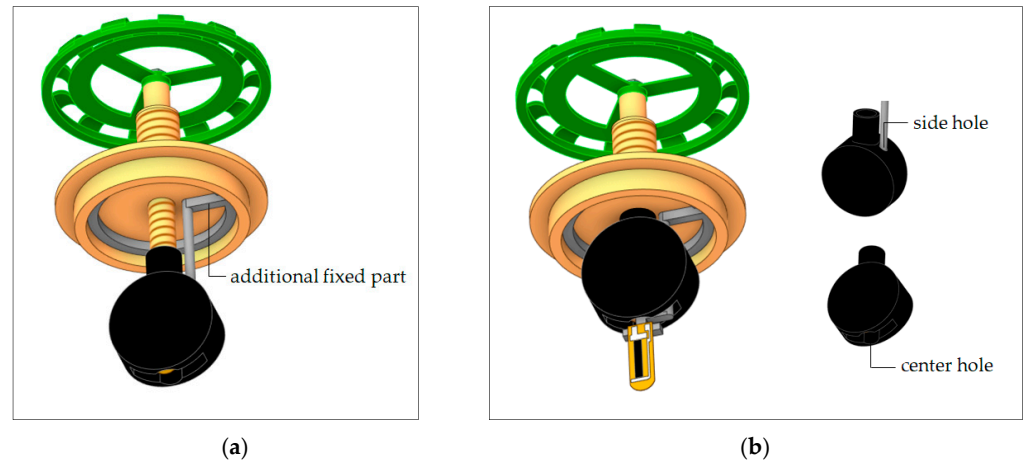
shows a gate-type flow control valve: In Figure 3a, the valve is open (retracted wedge) with the sensor positioned inside it, allowing the passage and flow measurement, and in Figure 3b, the valve is closed (wedge obstructing the passage), preventing flow.
